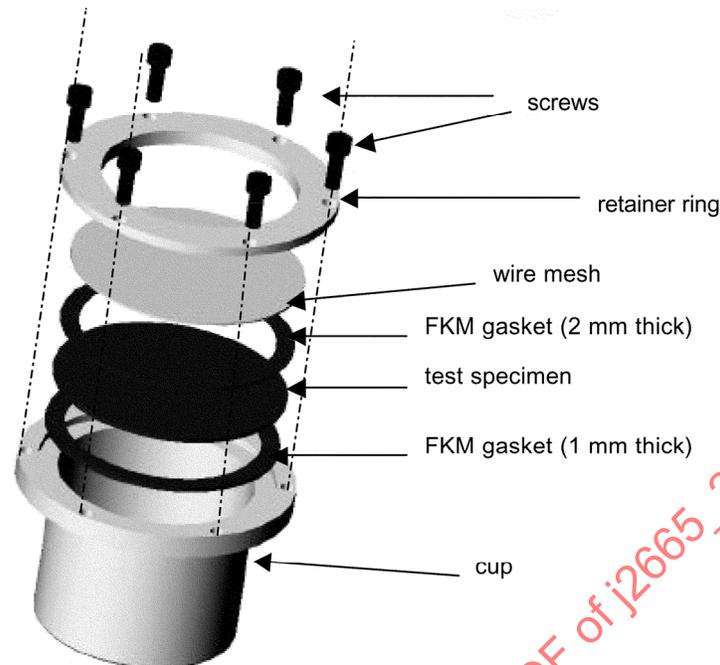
EXPLODED VIEW OF THE MODIFIED THWING-ALBERT PERMEATION CUP, SHOWING THE ASSEMBLY SEQUENCE OF THE COMPONENTS
